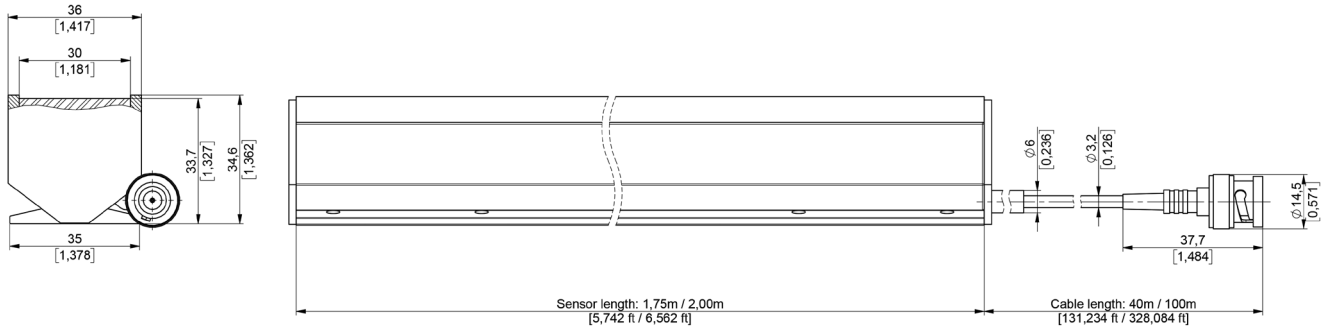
Dimensions of Lineas Compact subsurface (Type 9196ACxxS)
